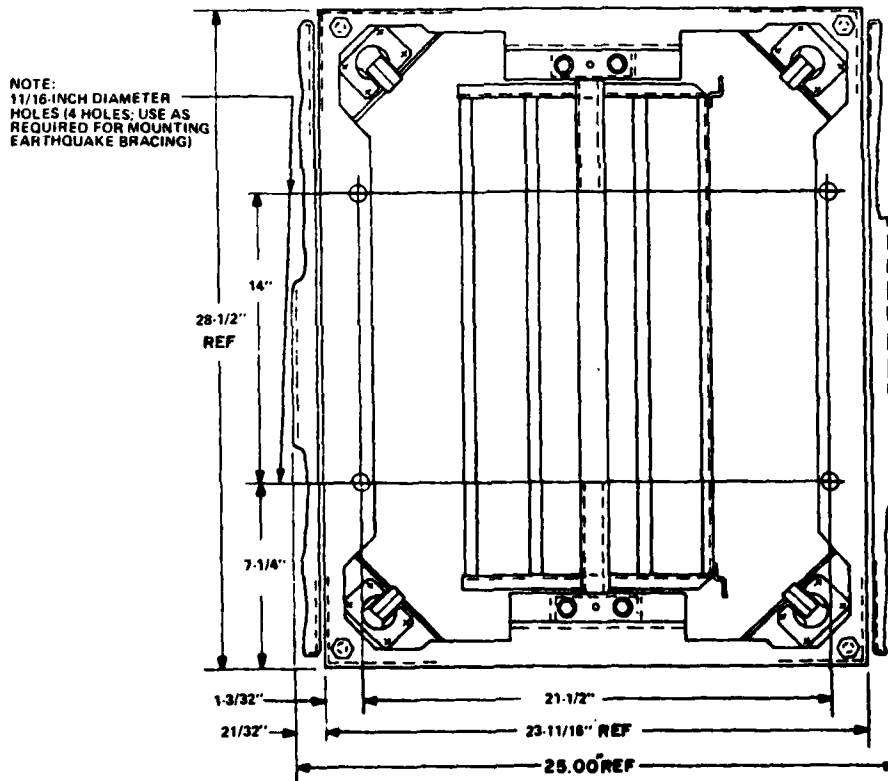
Bottom View of CEC and PEC, Showing Mounting Holes for Earthquake Bracing.
